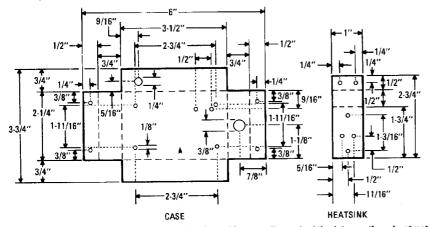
THE CASE AND HEATSINK can be fabricated from easily worked tinplate or other sheetmetal. The heatsink transfers the heat generated by the power transistor to the surface of the metal case.
